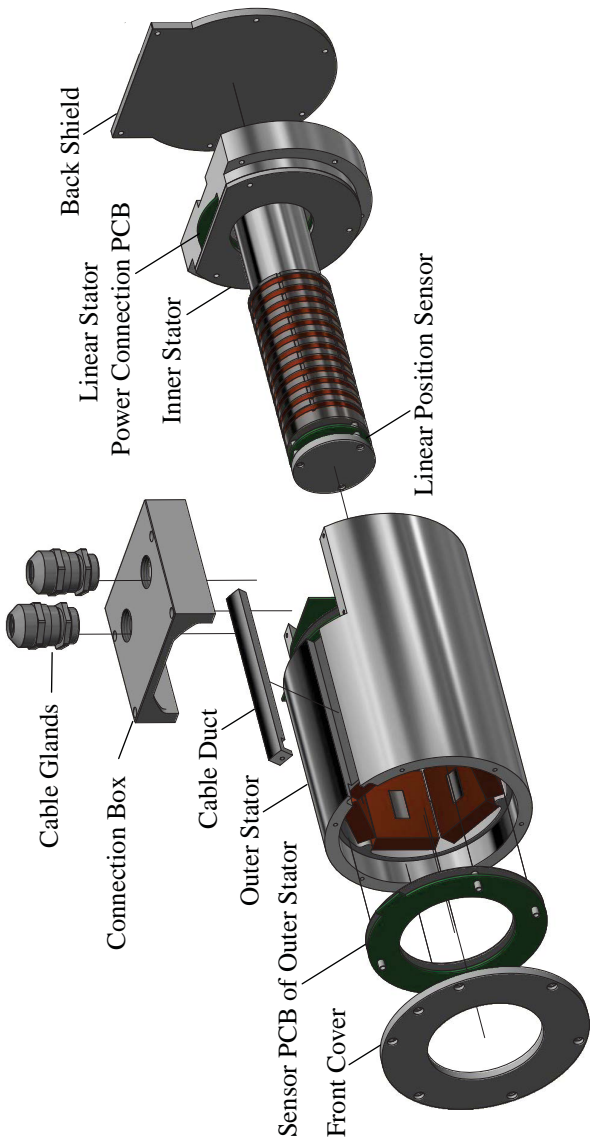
Exploded view of the rotary and linear stators of the DS LiRA. The two cable glands are used for the power connection cable and the sensor twisted pair cable. The cable duct is used to connect the outer rotary position sensor PCB located at the axial end opposite to the connection box.
